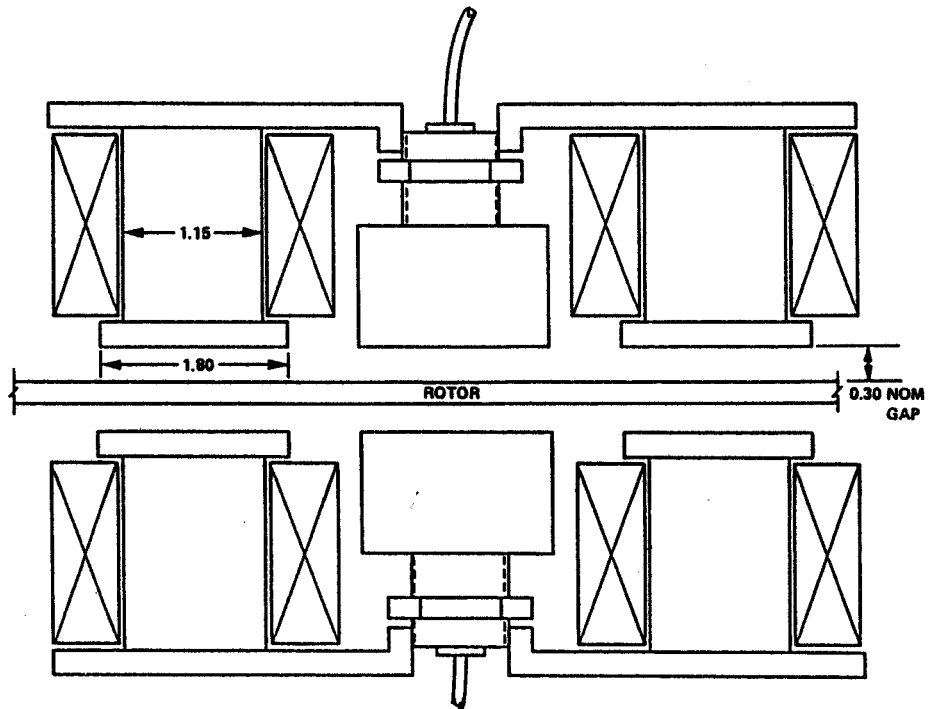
ASPS Axial Bearing Station (dimensions in inches)
